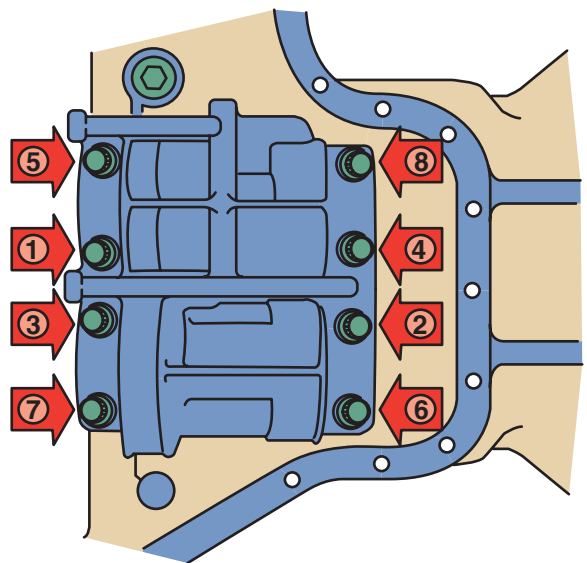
The balance shaft housing must be unbolted in the prescribed order to prevent shaft and housing warpage.
